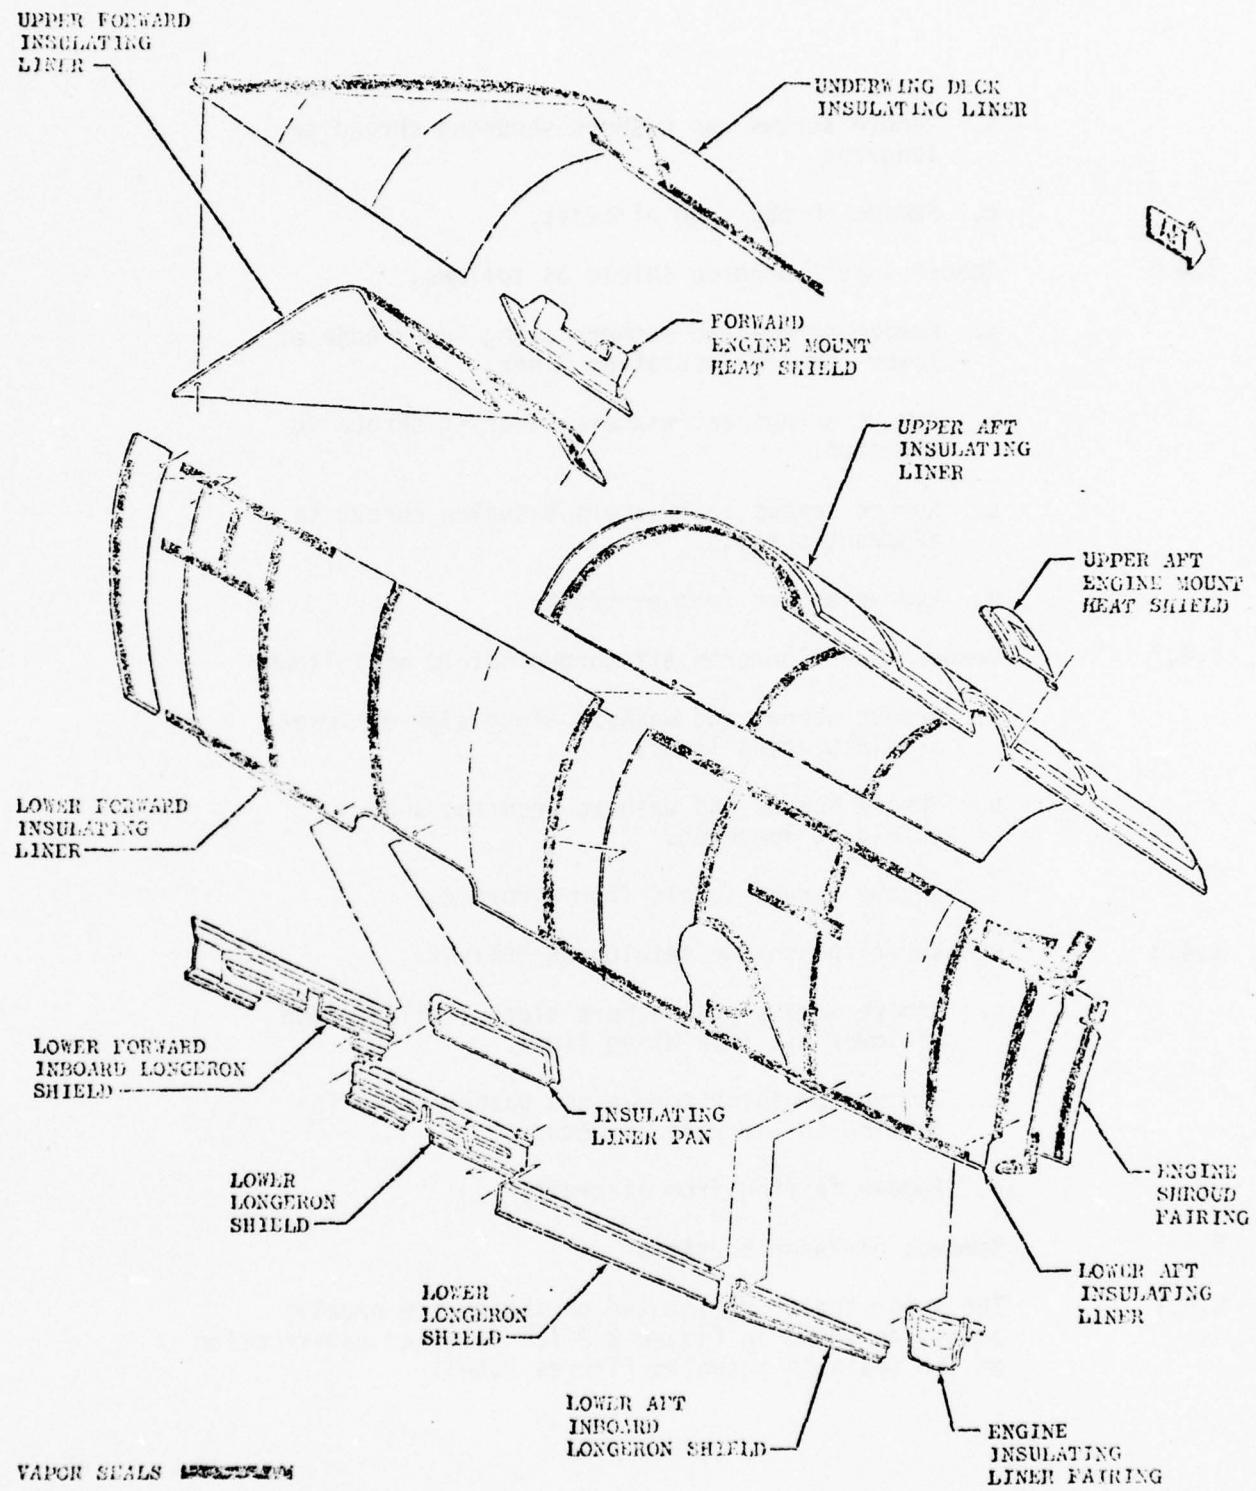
Engine Insulating Liners, Heat Shields and Vapor Seals (Sheet 2)
